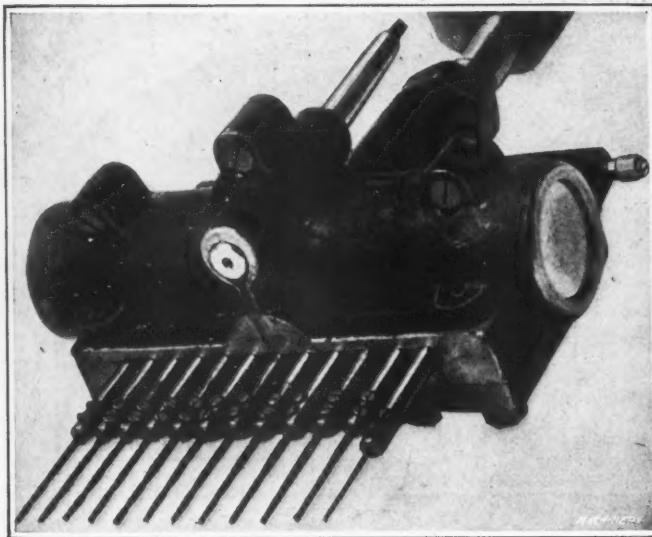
Twelve-spindle, Fixed-center Drill Head
